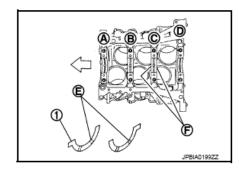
Identifying Thrust Bearing Installation Position Courtesy of NISSAN NORTH AMERICA, INC.
